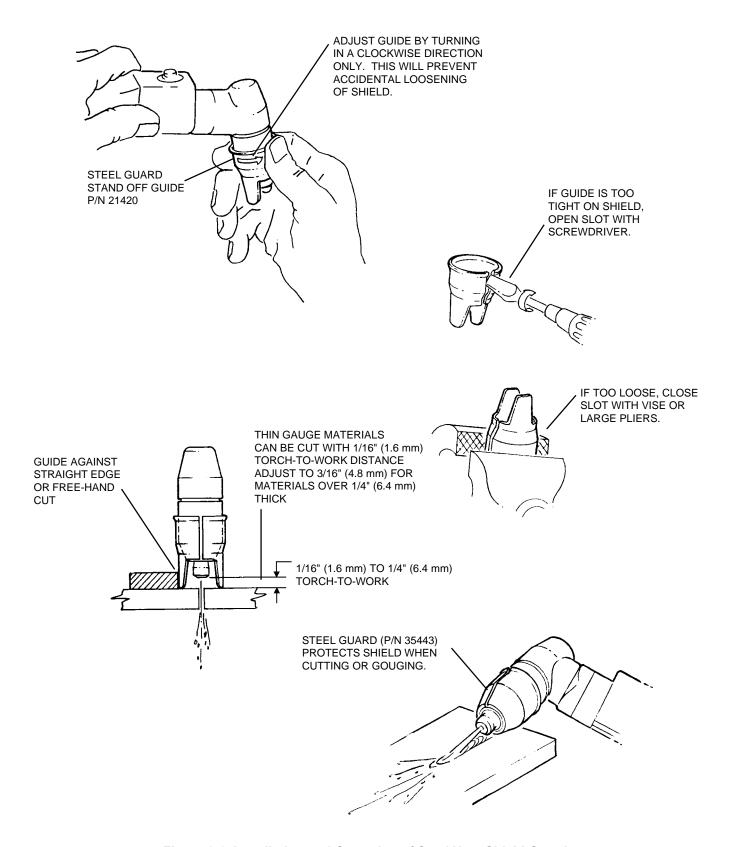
Installation and Operation of Steel Heat Shield Guards
